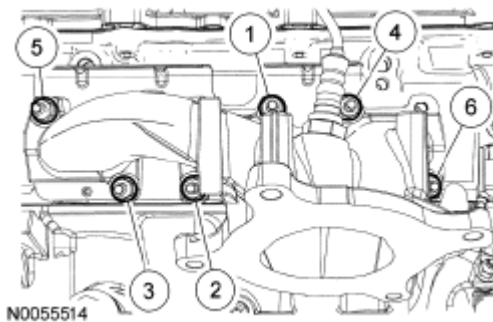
Identifying LH Exhaust Manifold Nuts Tightening Sequence
